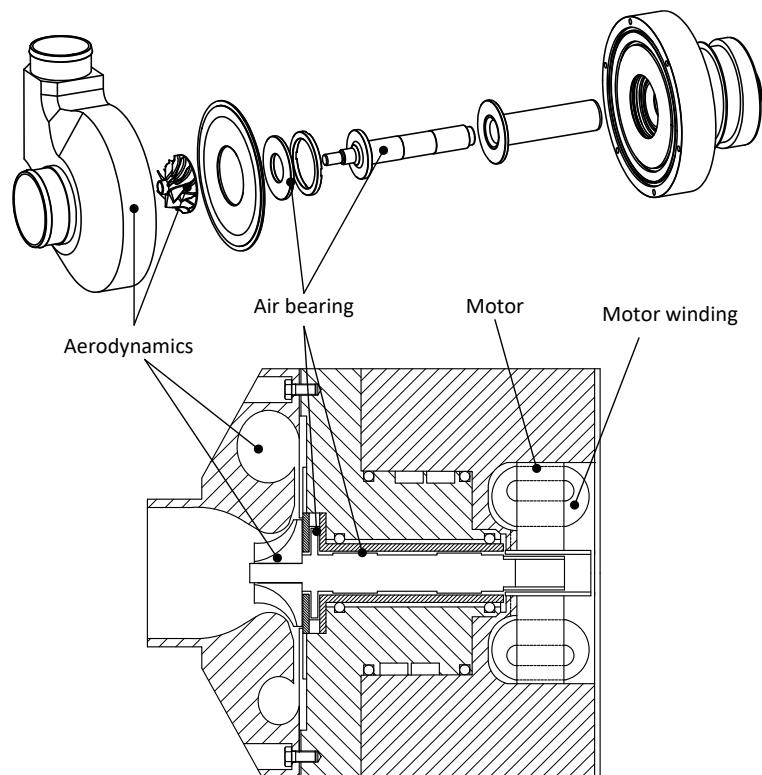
Compressor building blocks: motor, motor winding, aerodynamics, air bearing.
